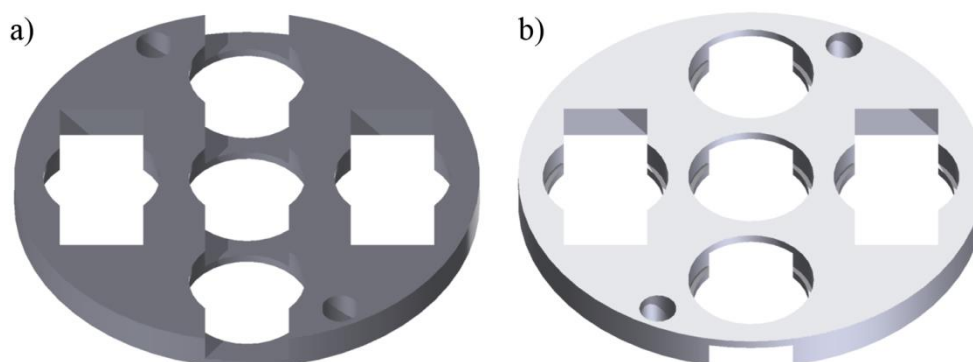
CAD drawing of a) the front and b) the back of the photocathode holder.
